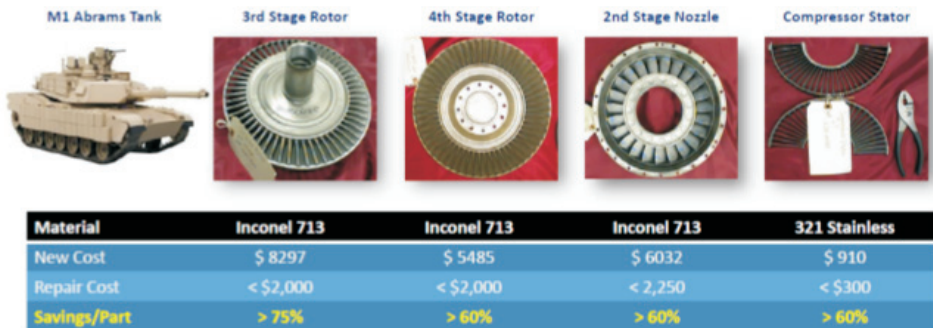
Example: US Army repair of components from Honeywell AGT 1500 gas turbine engine
